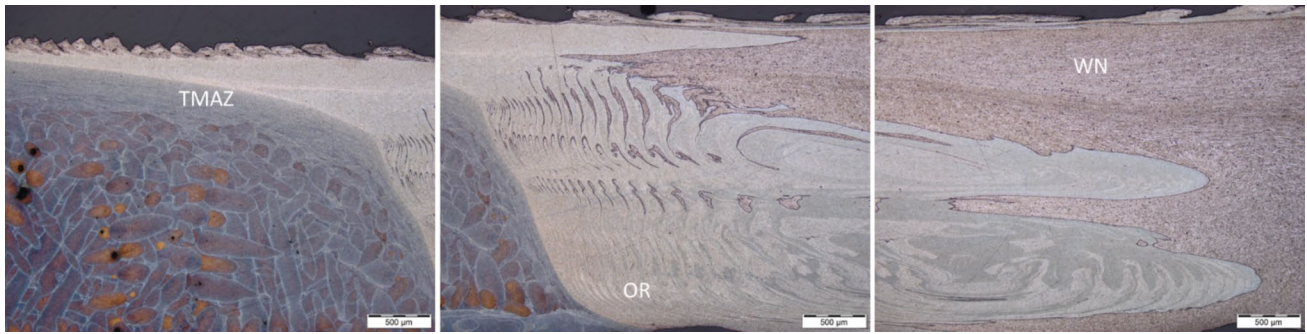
Cross-section of a FSW weld between conventionally manufactured EN AW-5083 and PBF-LB manufactured AlSi10Mg, highlighting the TMAZ, OR, and WN zones
